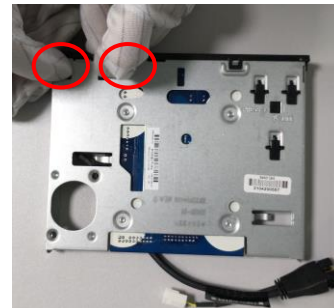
Loose the 4pcs switch card PCA screws and remove the switch card PCA
